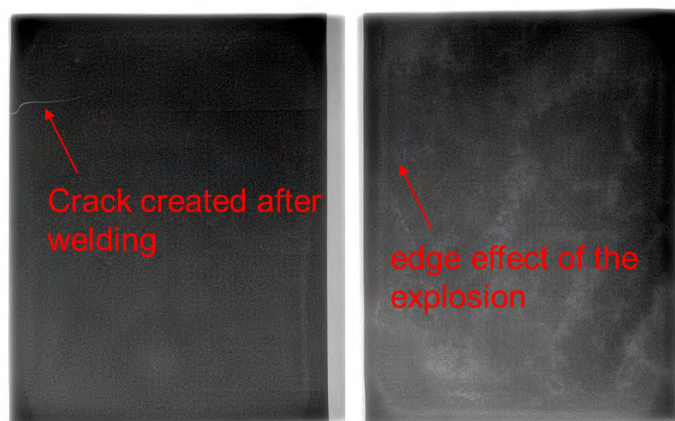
X-ray of explosively welded steel/steel plates with 540g and 640g of Demex
